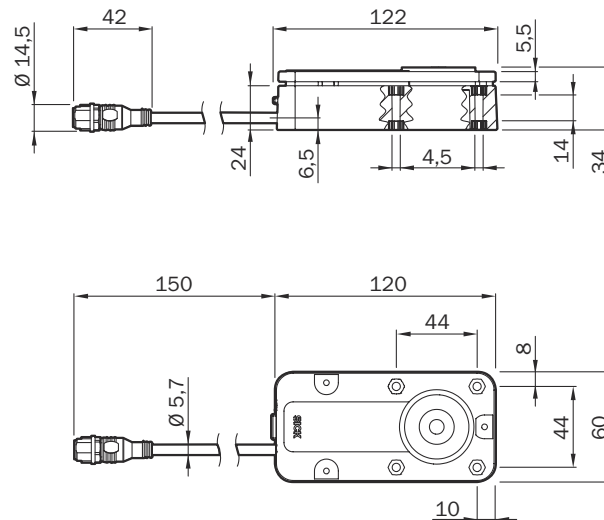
Dimensional drawing of MLP1 sensor with 1 × M12 male connector
